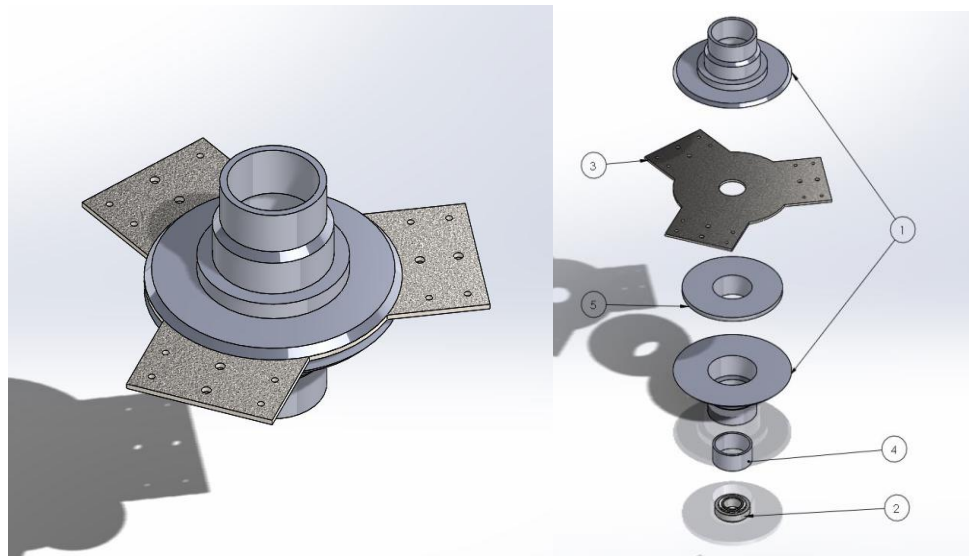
Main bearing assembly (left) and exploded view of bearing assembly (right)
